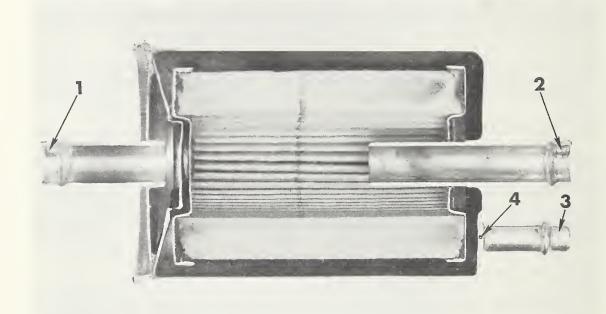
Fram filter, showing construction details - inlet (1), outlet to carburetor (2), return to tank (3), and orifice (4).
